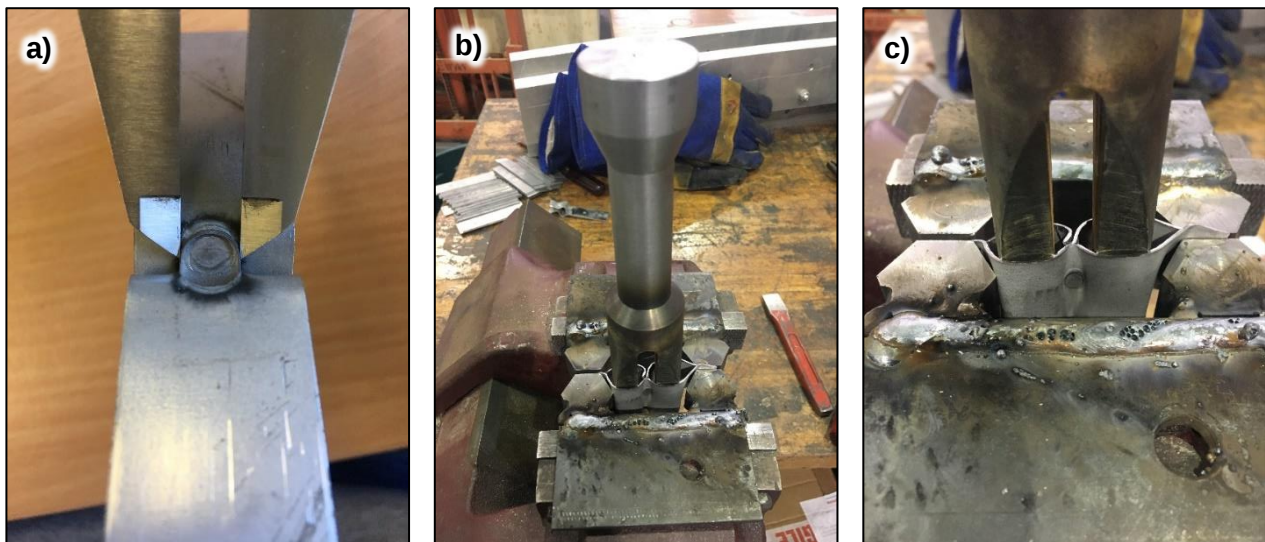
a) Spot weld chisel tool and fixture, b) destroying a spot weld, c) button diameter measurement
